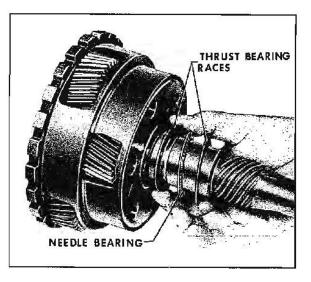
Removing Planet Carrier Thrust Bearing and Races
